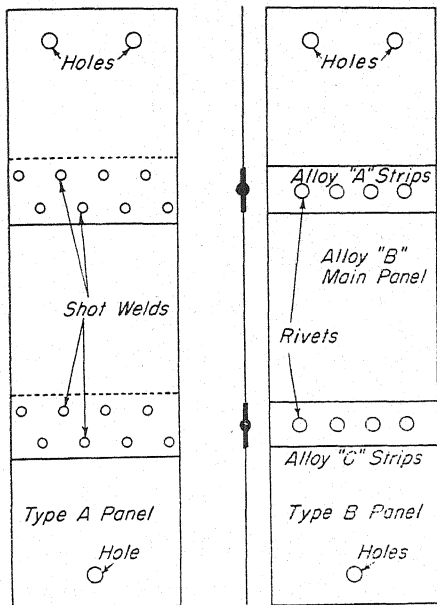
Types of Panels Used for Determining the Corrosion of Shot-welds, or of Dissimilar Metals in Contact.
